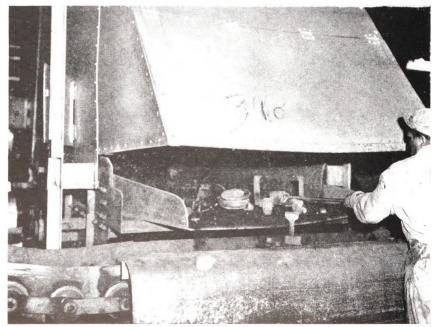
Castings emerging from a mechanical exhaust ventilated shakeout system. Laborer removes and places large castings in wheel barrow; conveyor system carries small castings to sorting room.
